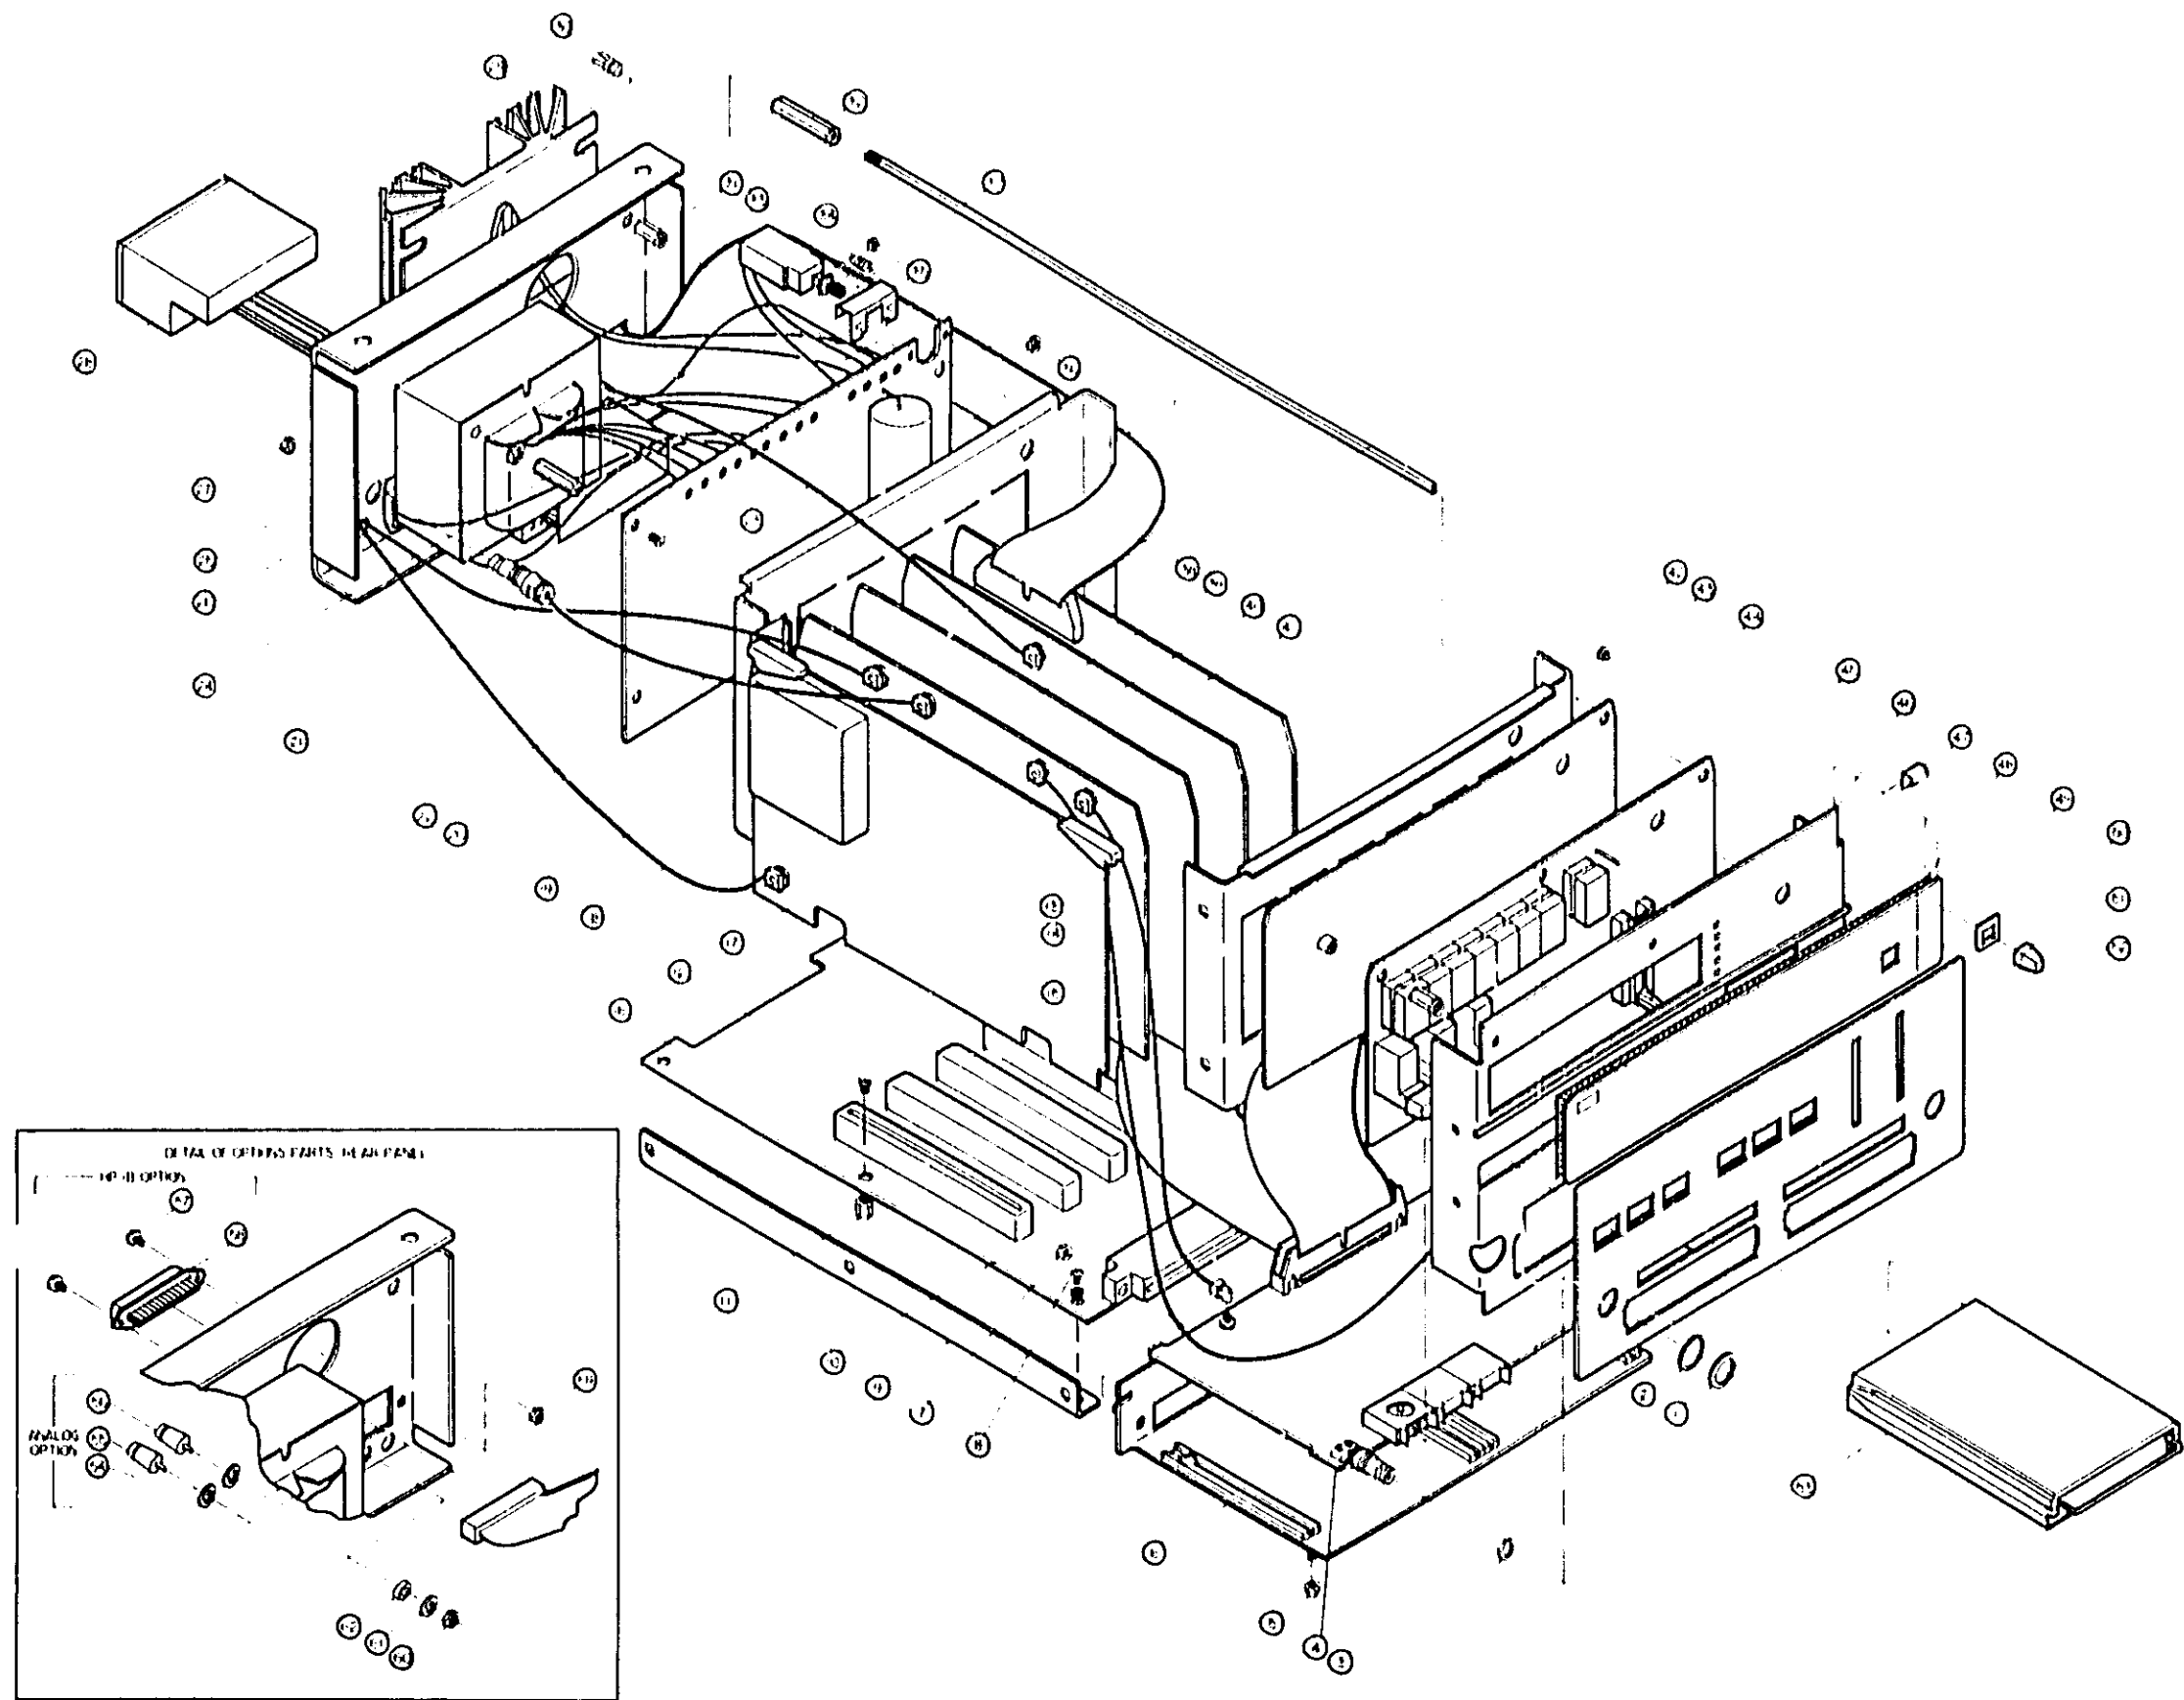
HP 2804A Chassis Parts, Exploded View
